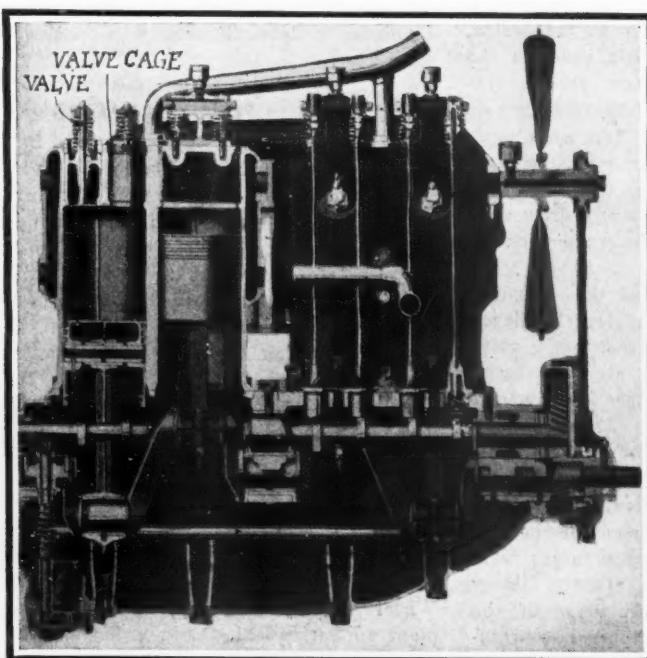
Sectional view of the Buick motor showing the valve cages, which are clamped in place in the cylinder head
